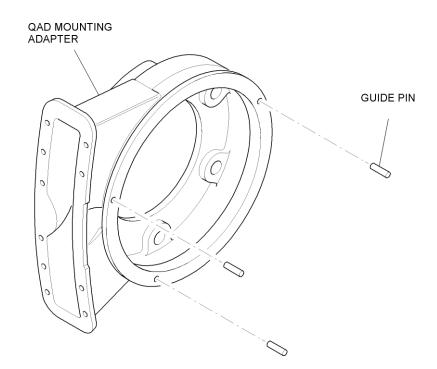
Repair of the Mounting Adapter Guide Pin
